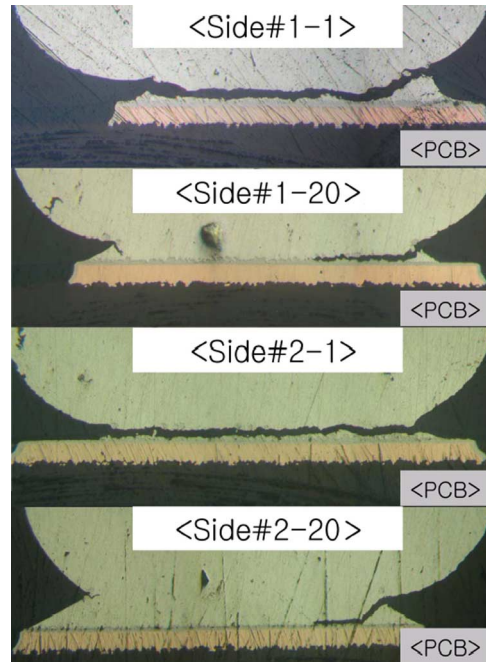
Optical micrographs depicting the exterior solder joints at each corner in SnAgCu-PBGA package.
